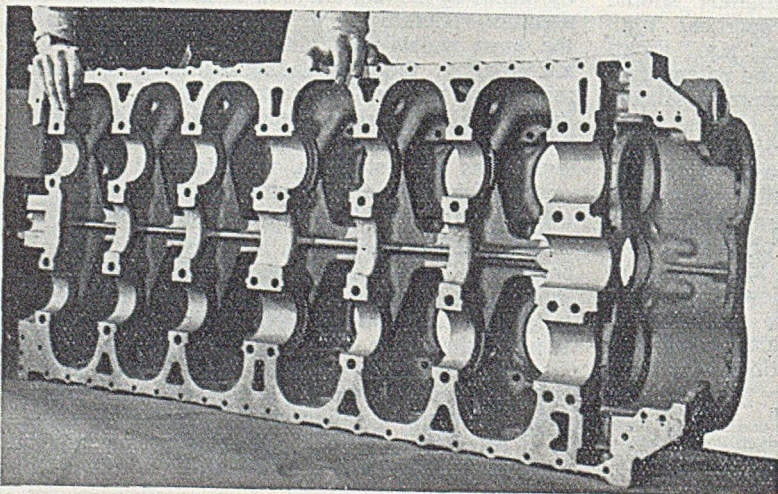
Cylinder Block for Napier "Sabre" Engine. Sand Cast in Hiduminium R.R.50 Alloy. Length, 47½ in.; width, 23½ in.; depth, 8½ in. Entire weight, 191 lb.
